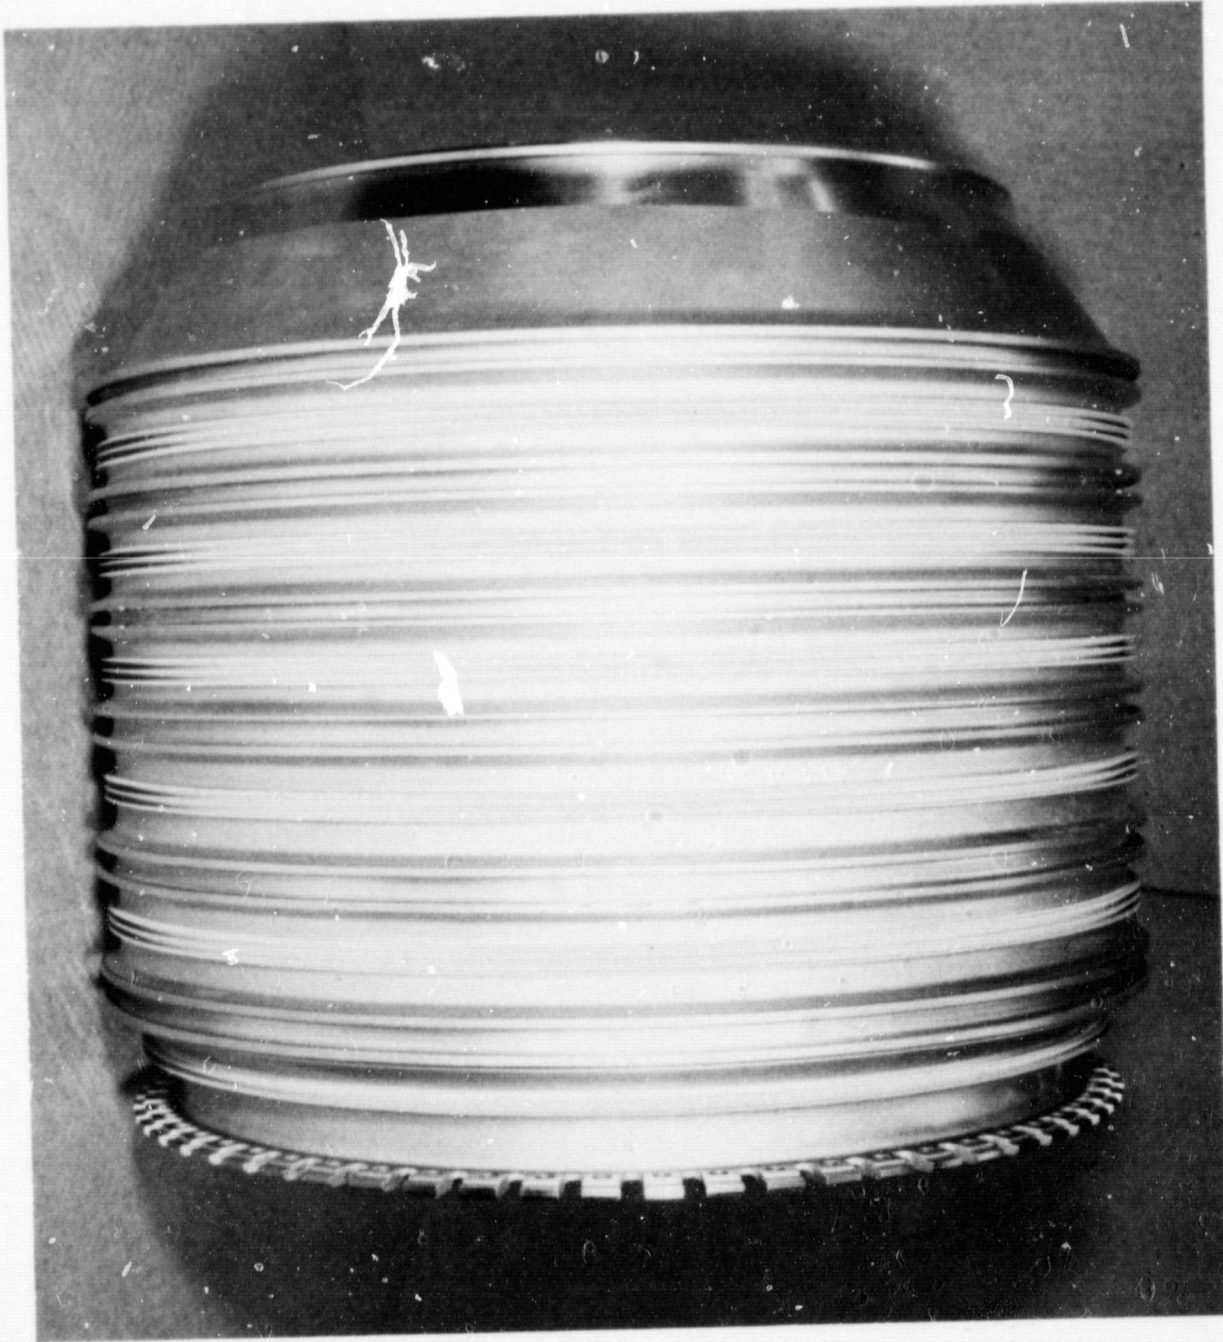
CFM56 Engine Inertia Welded and Finish-Machined Compressor Spool
